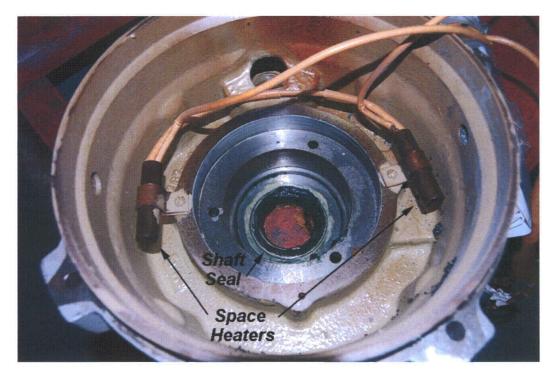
Drive End Bearing Bracket with space heaters installed. Space heaters are installed in the drive end only. Bearing cap not shown installed.
